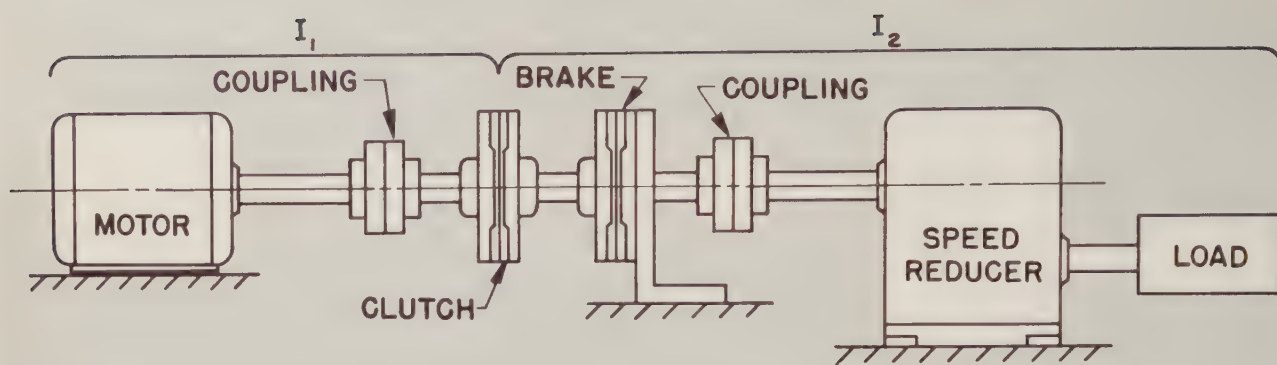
Shown here is a schematic representation of the arrangement used to drive and control the transfer mechanism for an automatic assembly machine. A clutch and brake unit allowed the speed reducer to be started and stopped
